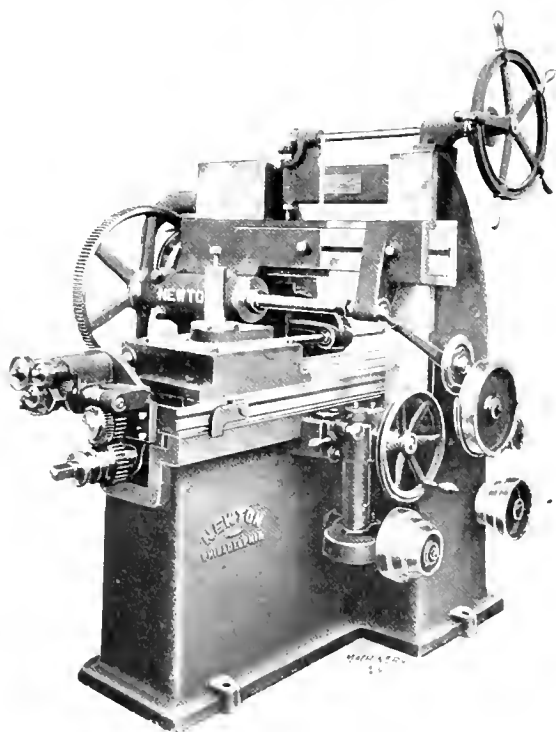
Positive Hobbing Attachment used in the Newton Milling Machine.
